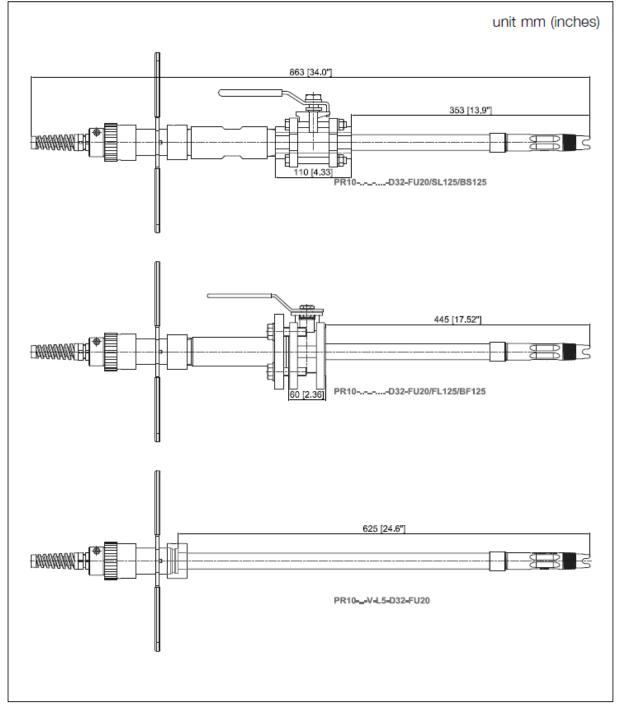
Dimensional drawing PR10...-D32 with mounted FU20 sensor
